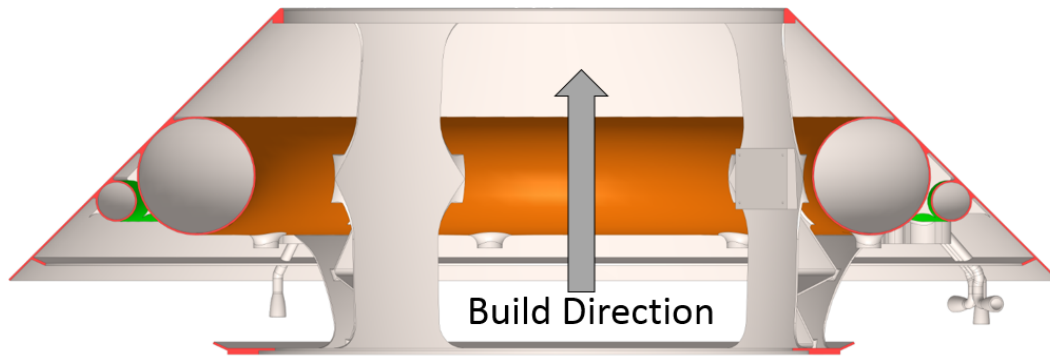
Cross section view showing the outer structure's build direction, red highlighted areas show where the section view intersects the part.
